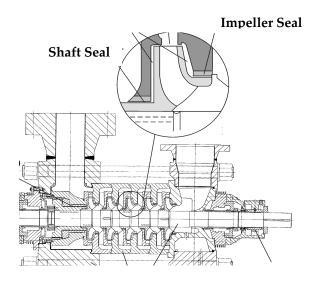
Impeller and Shaft Seals in a Centrifugal Pump
